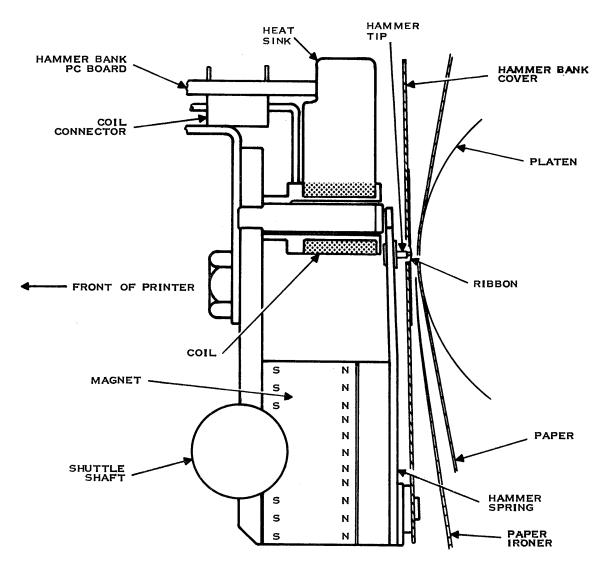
LP300 Printer Hammer and Shuttle Arrangement, Cross Section
